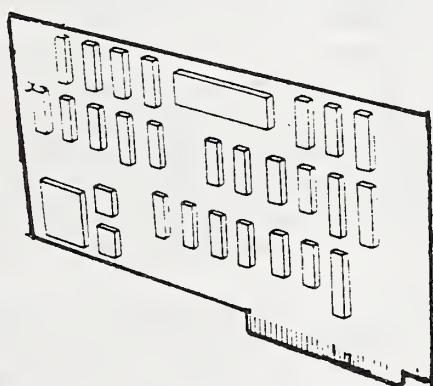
Printed Circuit Board (from [IBM81] p. 5-41)
